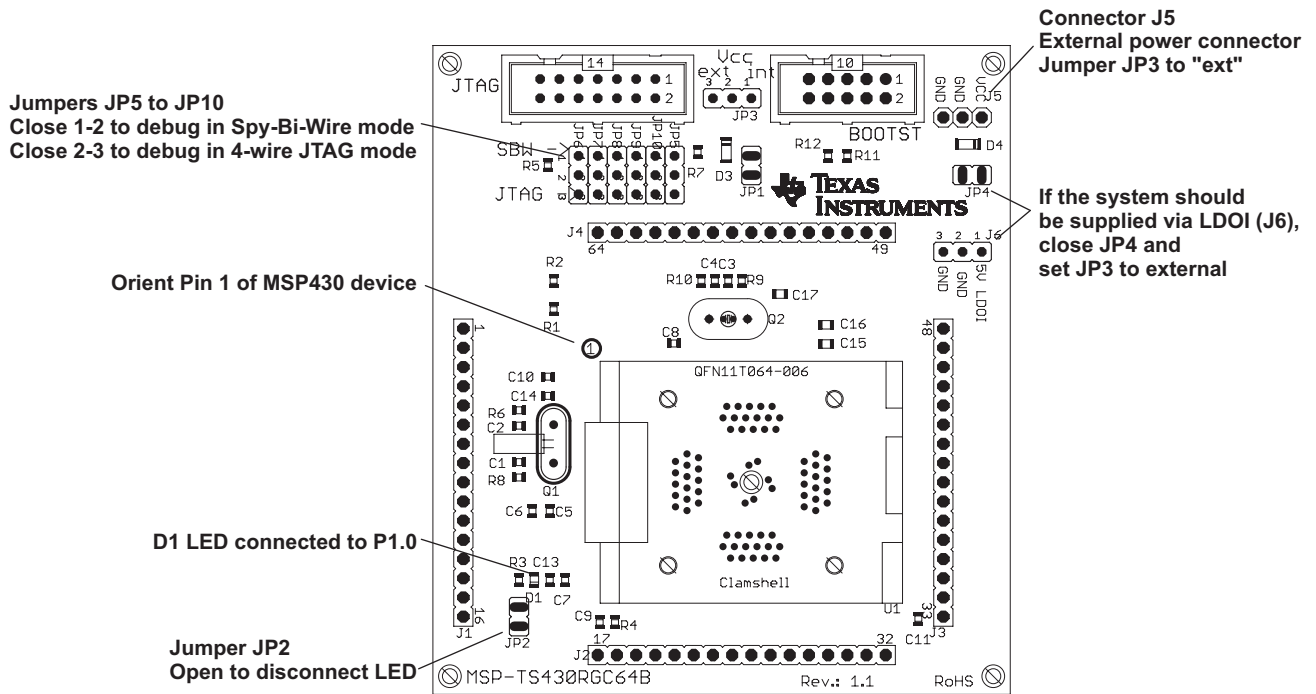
MSP-TS430RGC64B Target Socket Module, PCB
